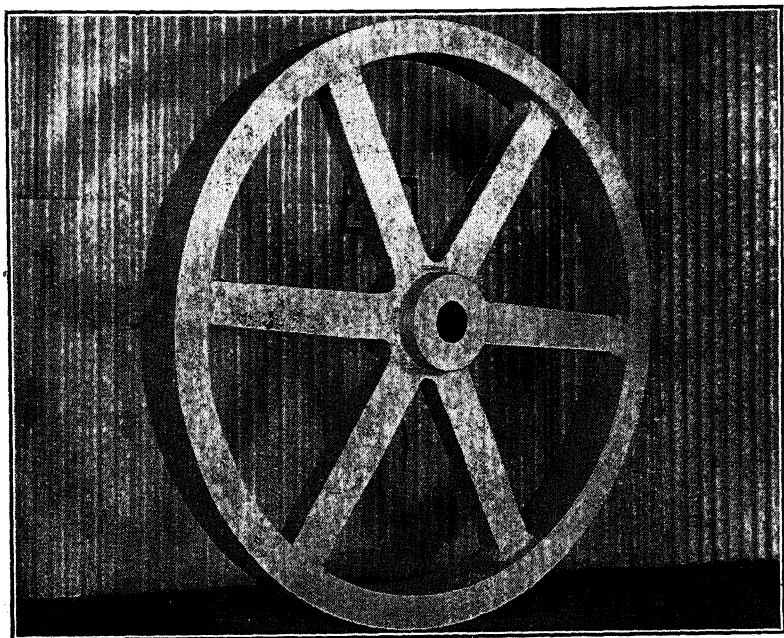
Three pieces of rolled steel were fused into one by the electric arc to form this six-spoke gear blank.
